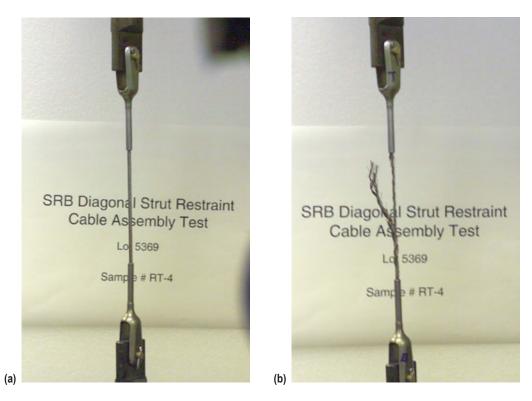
5369–RT–4 (a) before testing and (b) after testing.
